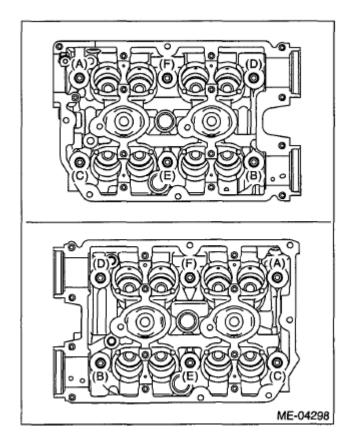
Identifying Cylinder Head Bolts In Sequence
